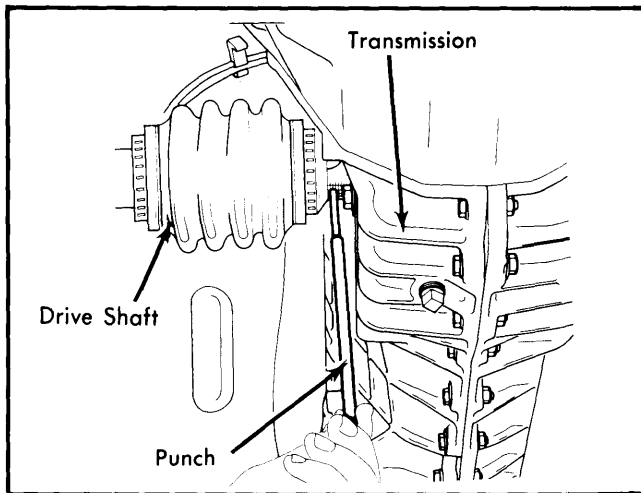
View Showing Removal of Drive Shaft Roll Pin
